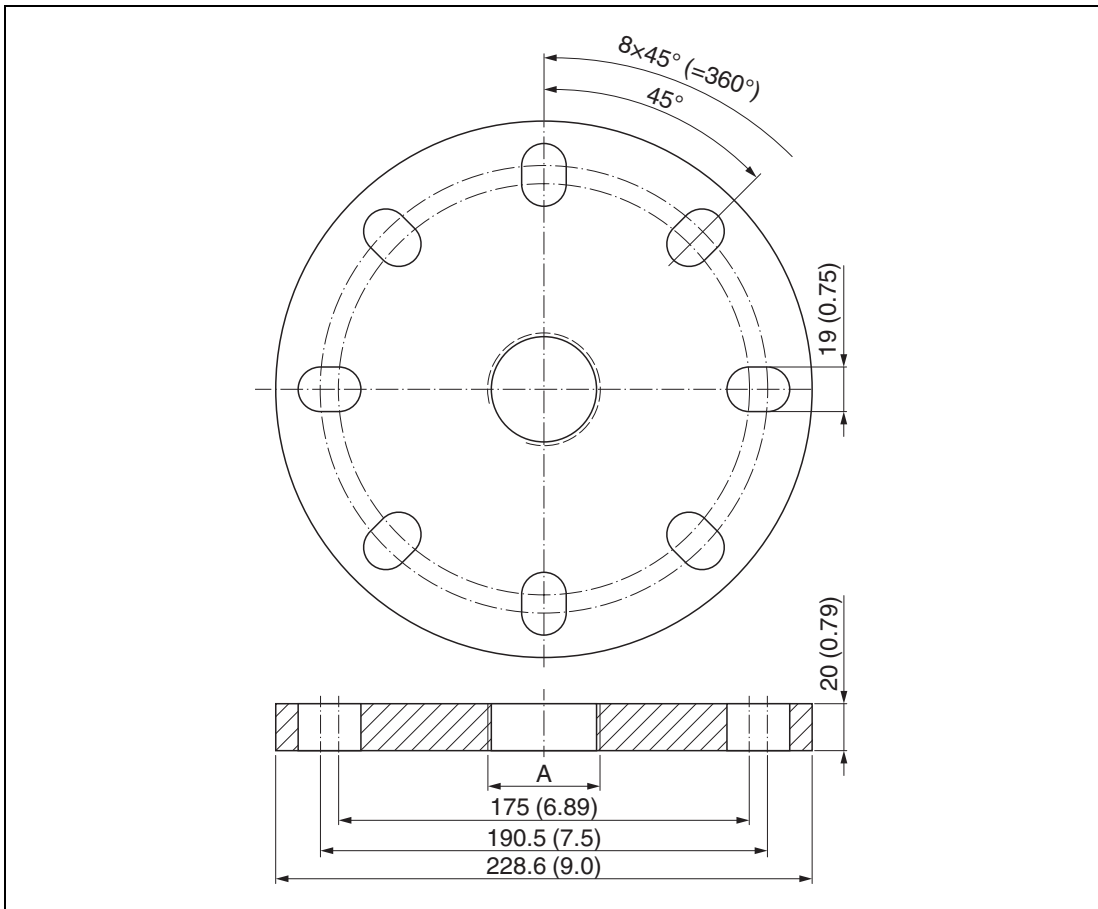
Dimensions of UNI flange 4 inch/DN100/100, engineering unit: mm (inch)
